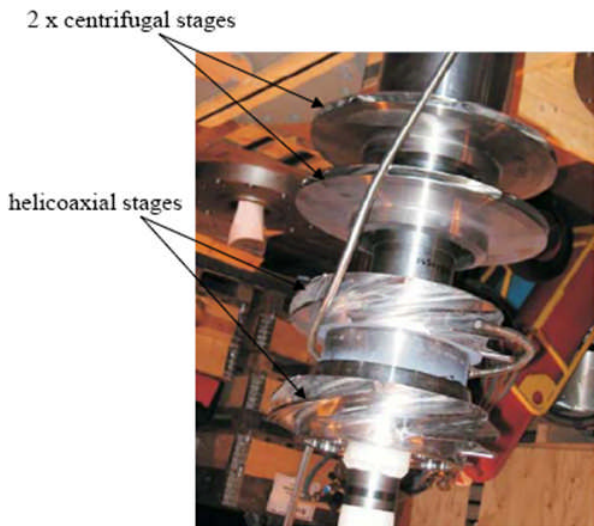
View of a typical Framo helico-axial pump (entire pump and section of impeller)
